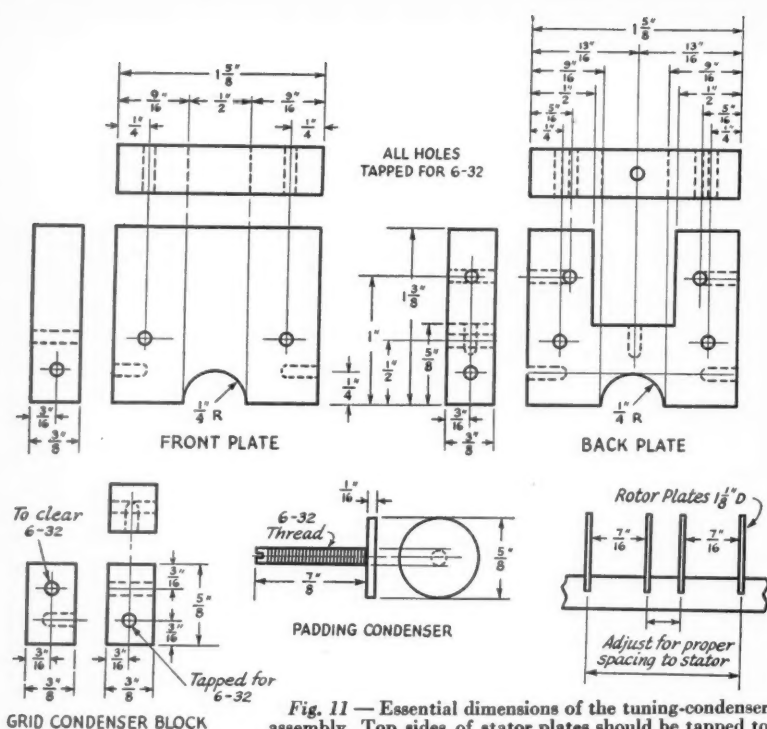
Essential dimensions of the tuning-condenser assembly. Top sides of stator plates should be tapped to fit socket contacts.
